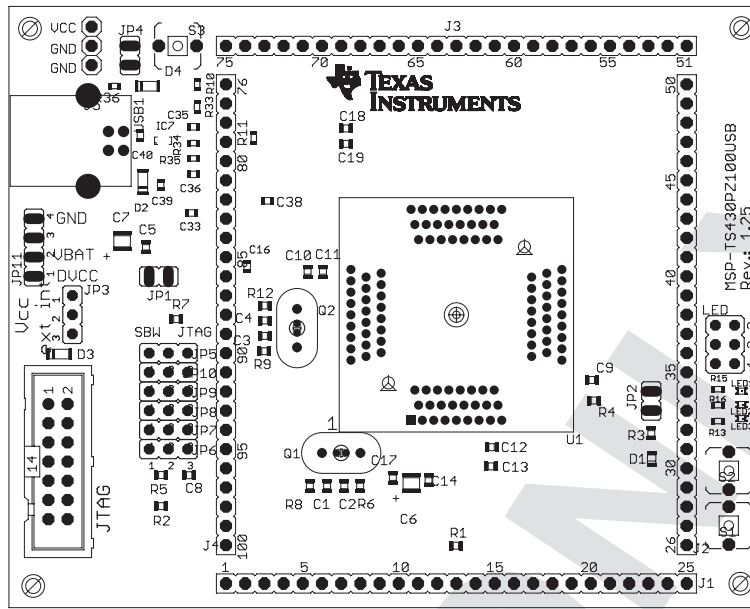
MSP-TS430PZ100USB Target Socket Module, PCB
